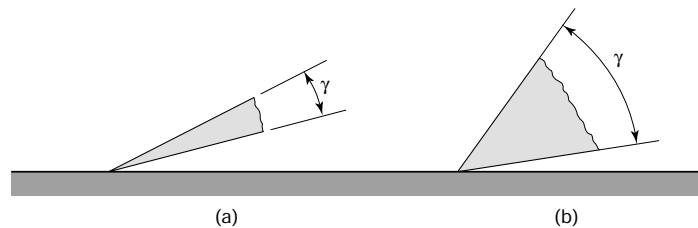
Wedge (tool) angle (γ): (a) blade sharpened for cutting wood; (b) blade sharpened for cutting metal
